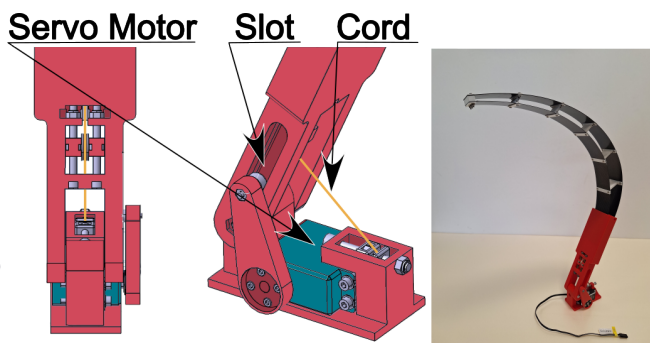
The final arm design features an integrated servo motor. Left: CAD design. Right: Assembled arm.
